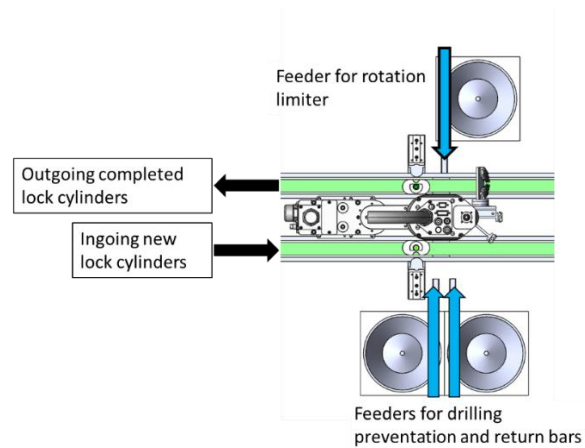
Feeder and actuator arrangement for lock cylinder pre-assembly.
